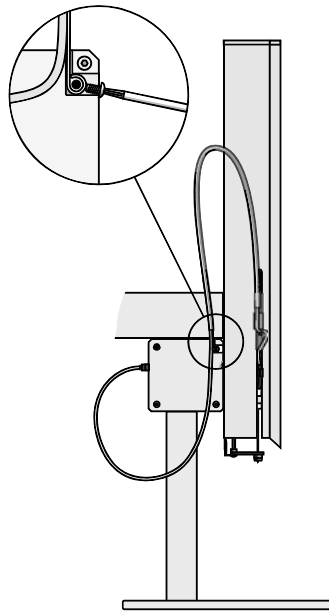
Connecting the Guide Wire to the X-axis End Cover.
